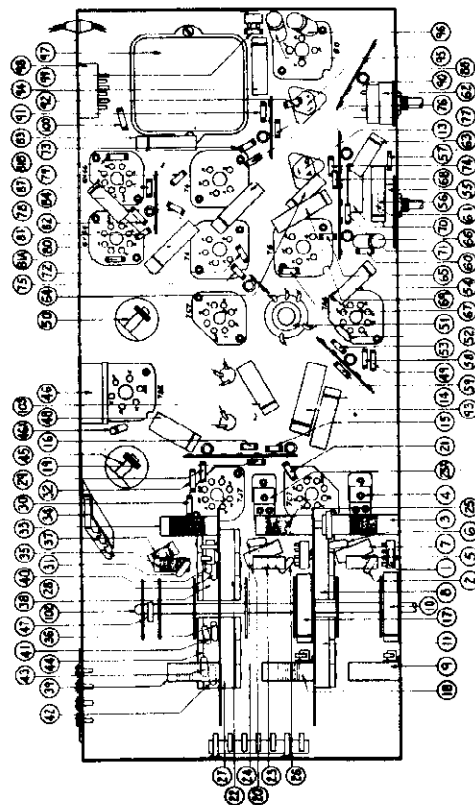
PART LOCATIONS, UNDERSIDE OF CHASSIS
